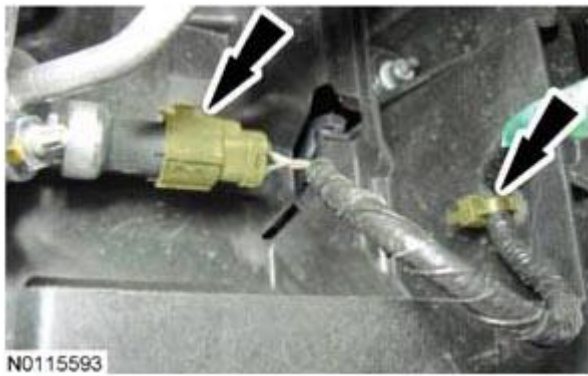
Locating A/C Pressure Transducer Electrical Connector
